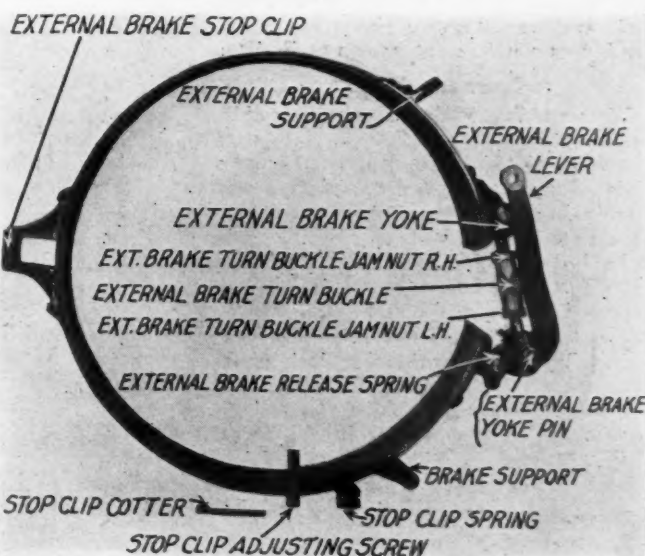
To Remove External Brake Displace Cotter Pin, Stop Adjusting Screw and Spring Shown, Then Brake Bolt Nuts From Each of Adjusting Bolts
